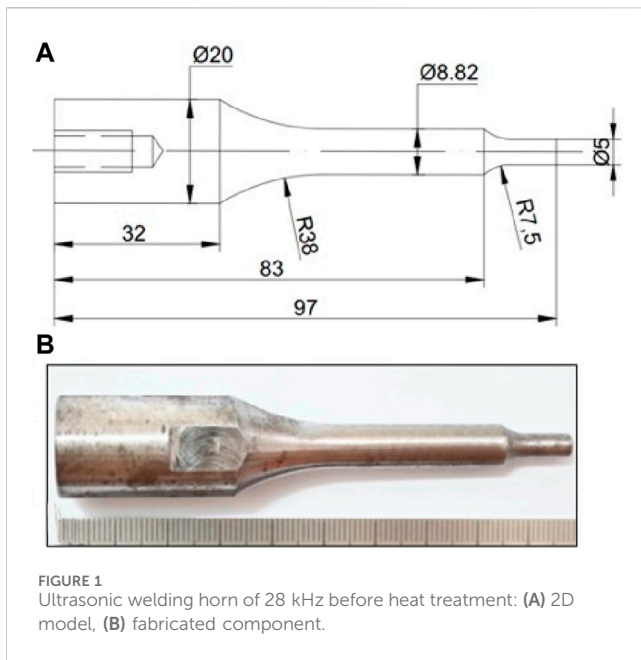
Ultrasonic welding horn of 28 kHz before heat treatment: (A) 2D model, (B) fabricated component.
